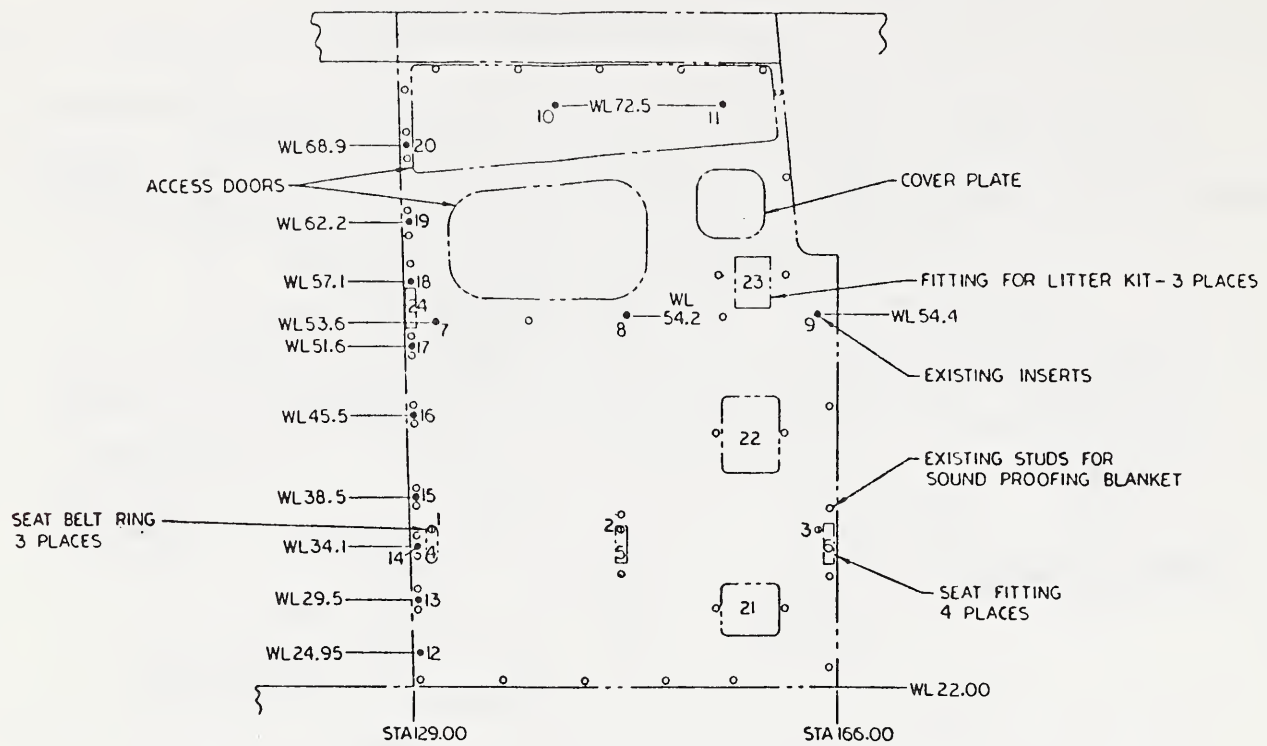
Bell 212 B.L. 14 lefthand wall fittings.
